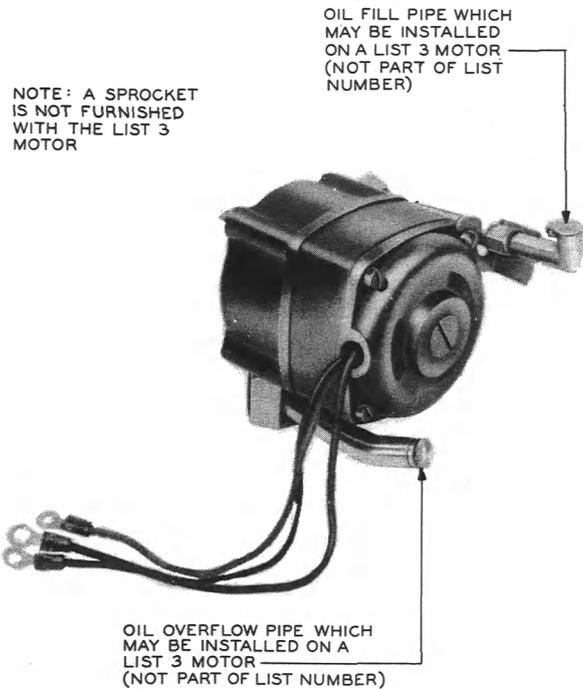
List 3 Holtzer-Cabot Motor Modified by Pipes Attached to Oil Fill and Overflow Holes in Gear Case
